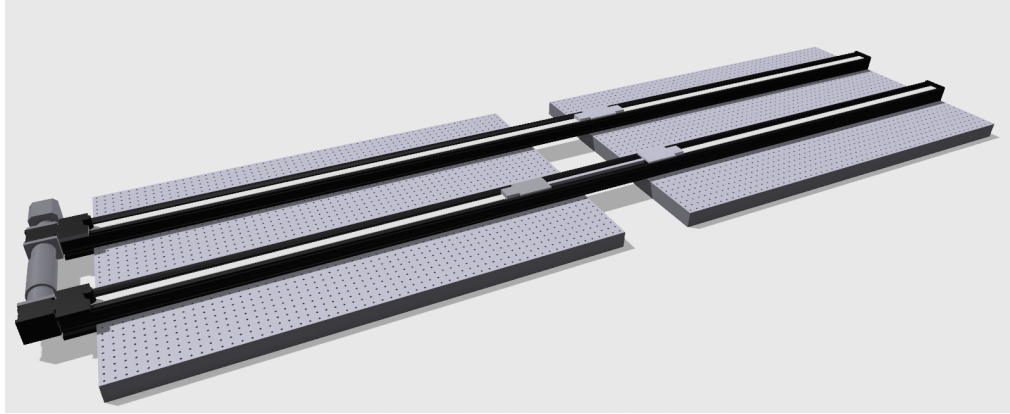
x -axis linear positioners mounted on the optical breadboards
